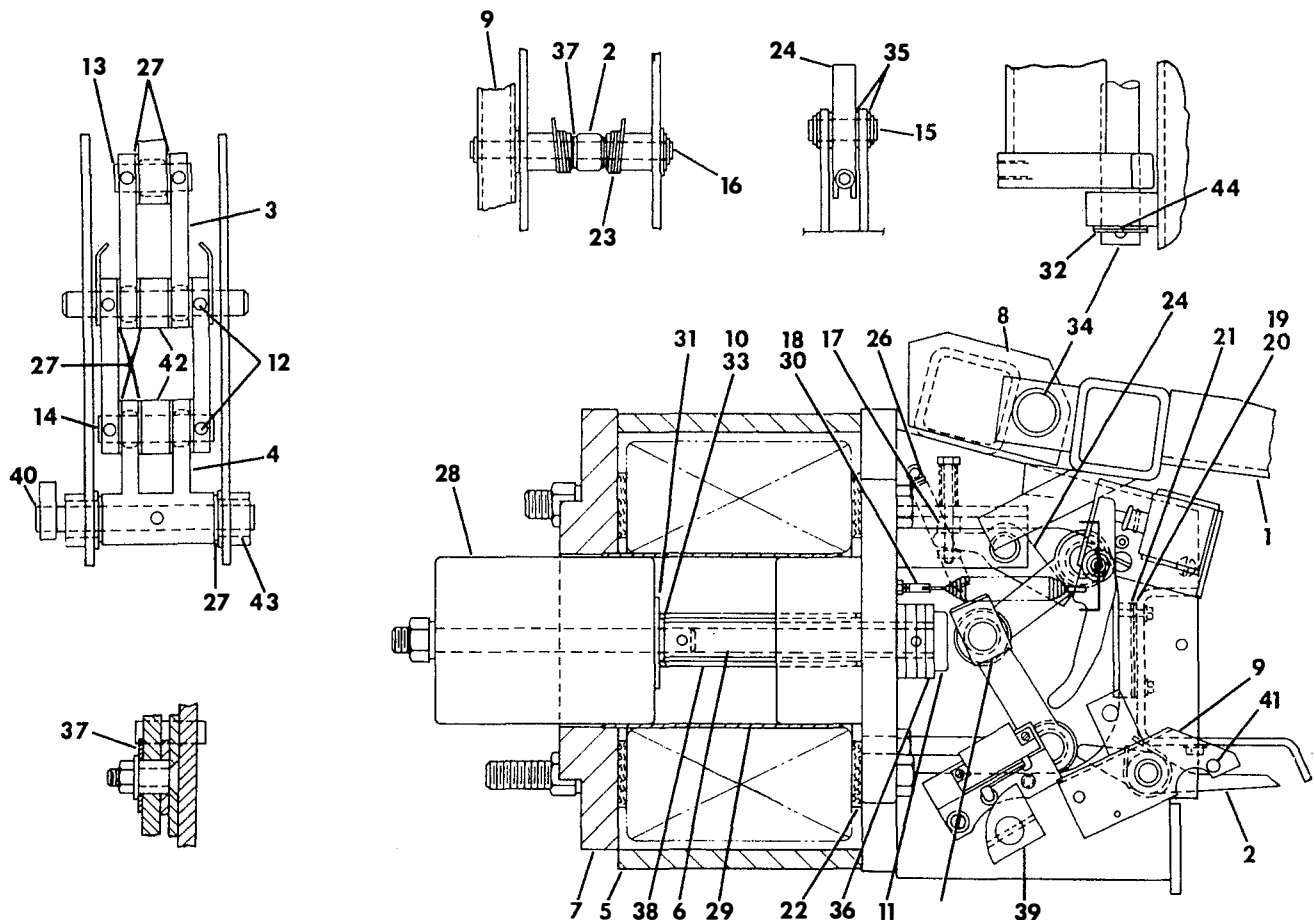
Solenoid Operator Assembly (72-320-036-501)
